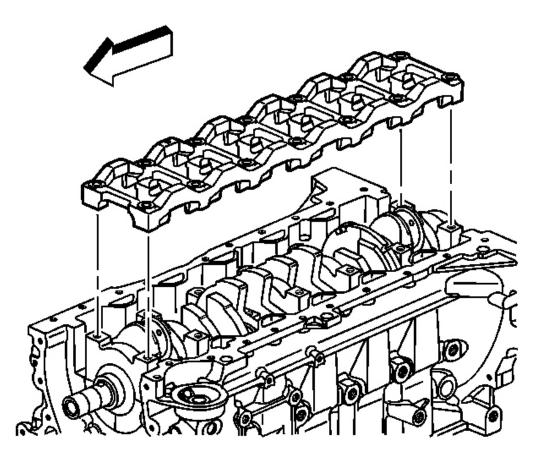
View Of Crankshaft Main Bearing Cap Stiffener Courtesy of GENERAL MOTORS CORP.
